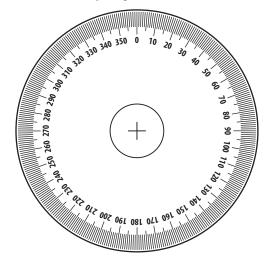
Print this scale out at 100% (do NOT print to fit), and glue it onto the pulley wheel. You can then use it to manually index your part for machining. Be sure to tighten down the screw on your spindle lock before any milling or turning.
